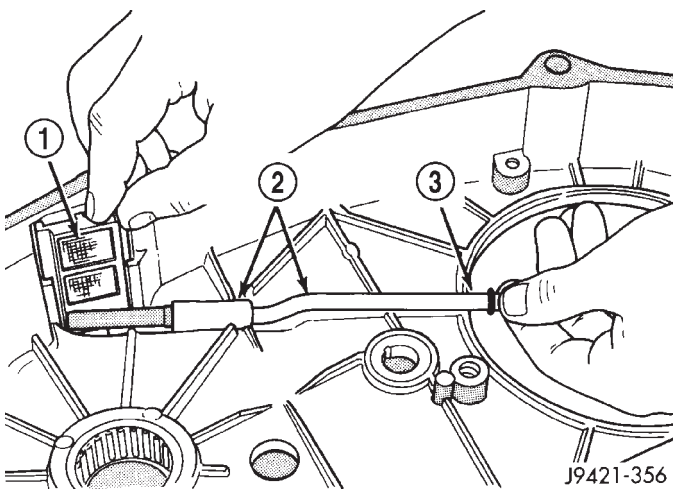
Oil Pickup Tube And Filter Position In Rear Case
